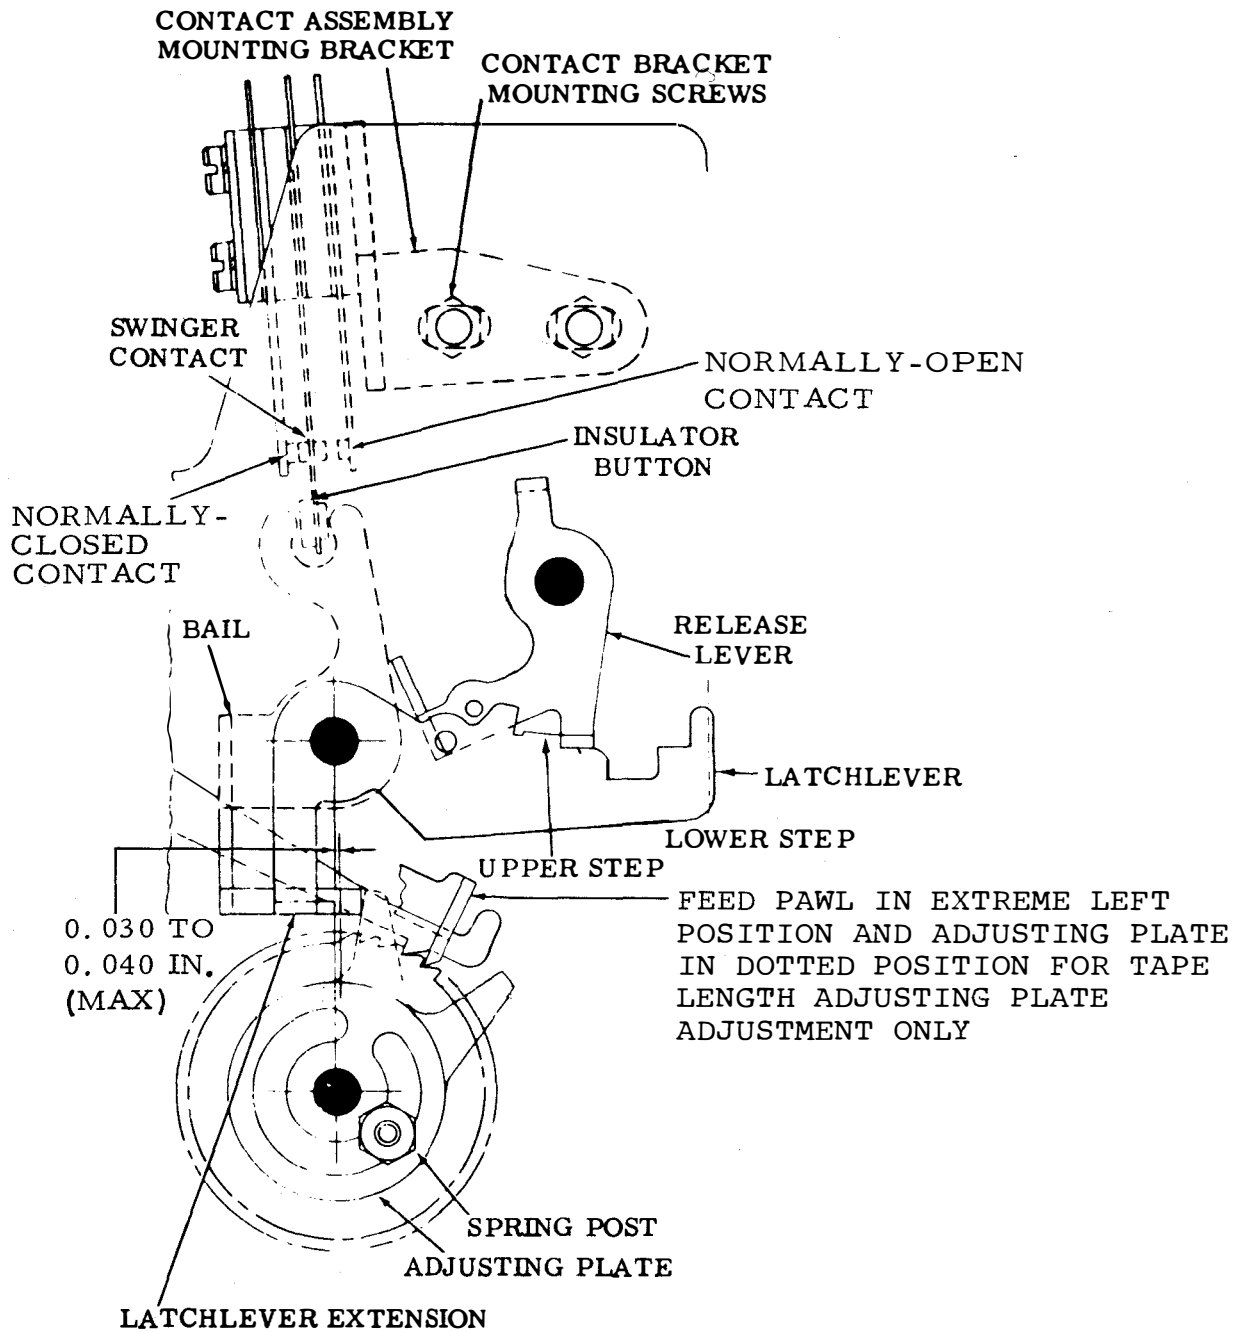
Tape Length Adjusting Plate and Contact Assembly Mounting Bracket, Reperforator, Front View
